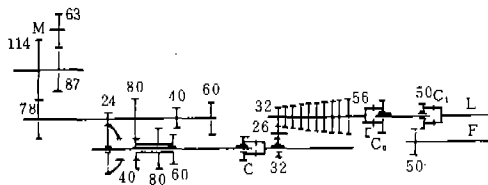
Gear train for cutting inch screw (KOHEMA-860 lathe)
